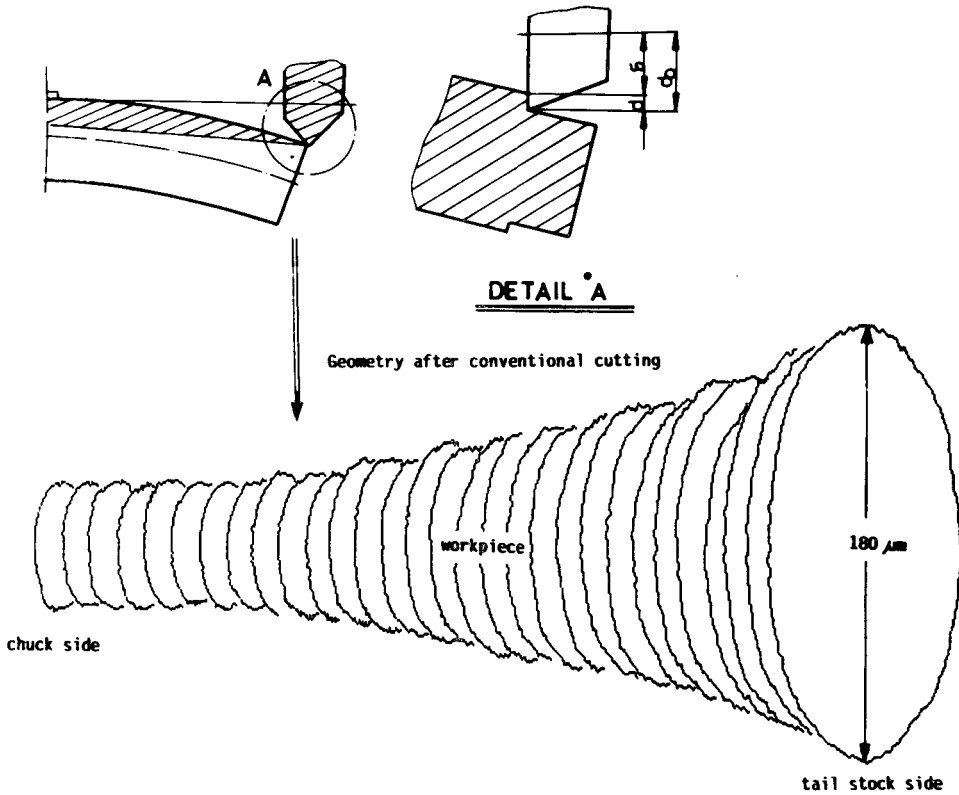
Cylindrical workpiece geometry after conventional cutting
